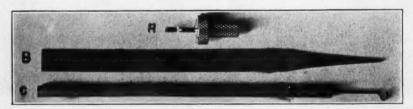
Shows the file, solder trimmer, and steel wire used in making the locks.
